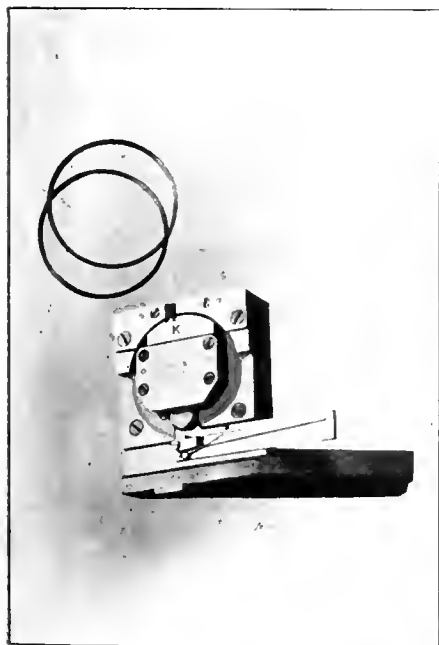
Tool formerly used for Locating the Thinnest Part of the Rings prior to Splitting
